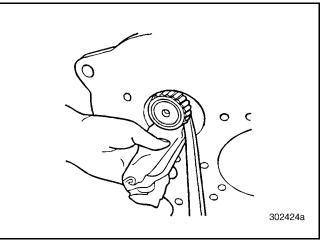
Moving and Blocking No. 1 (Upper Left) Countershaft Away from Mainshaft
